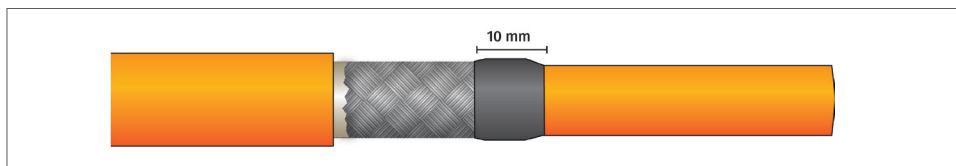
Step 5: Attaching and fixing the heat-shrink tubing
